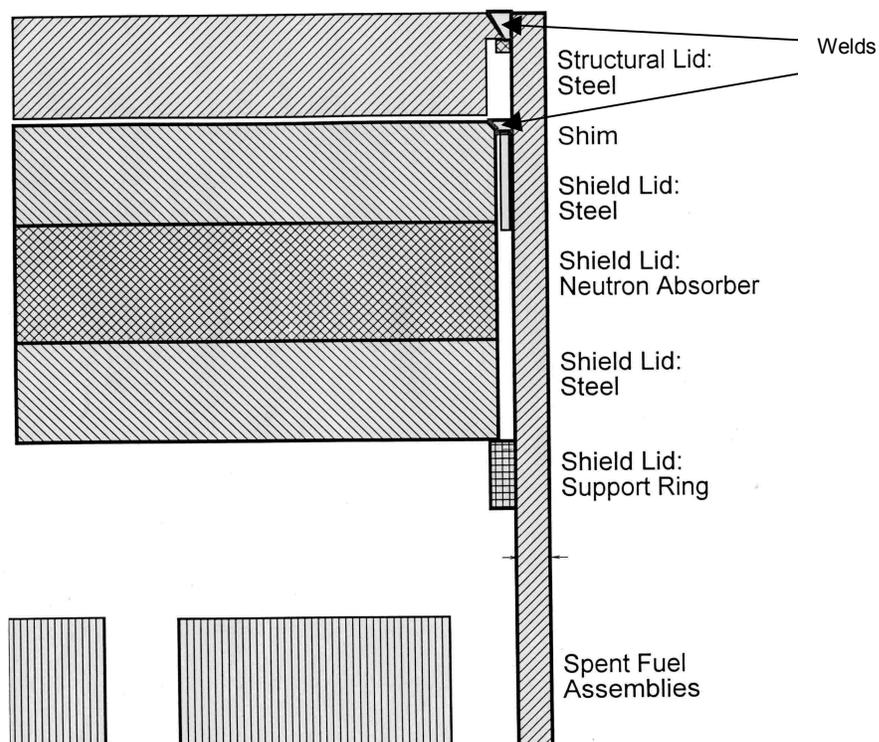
Illustration of Closure Welds for the VSC-24 Dry Storage Cask
